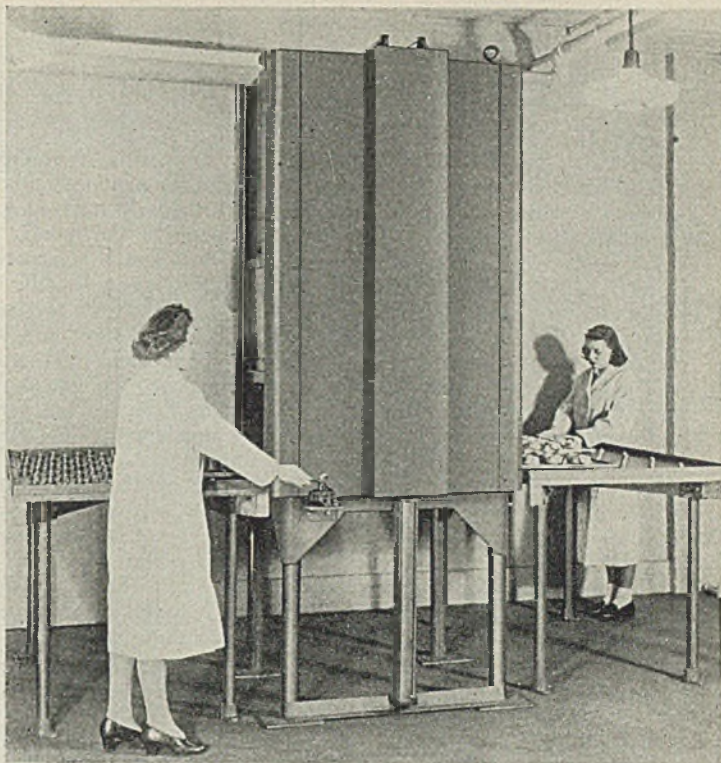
Air valve being moved by operator at left actuates pneumatic-cylinder drives that open and close doors of X-ray cabinet quickly
